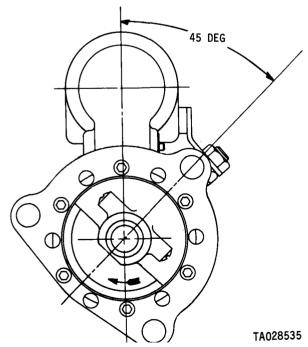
Pinion housing position for LD-465-1, LD-465-1C and LDT-465-1C engine applications.
